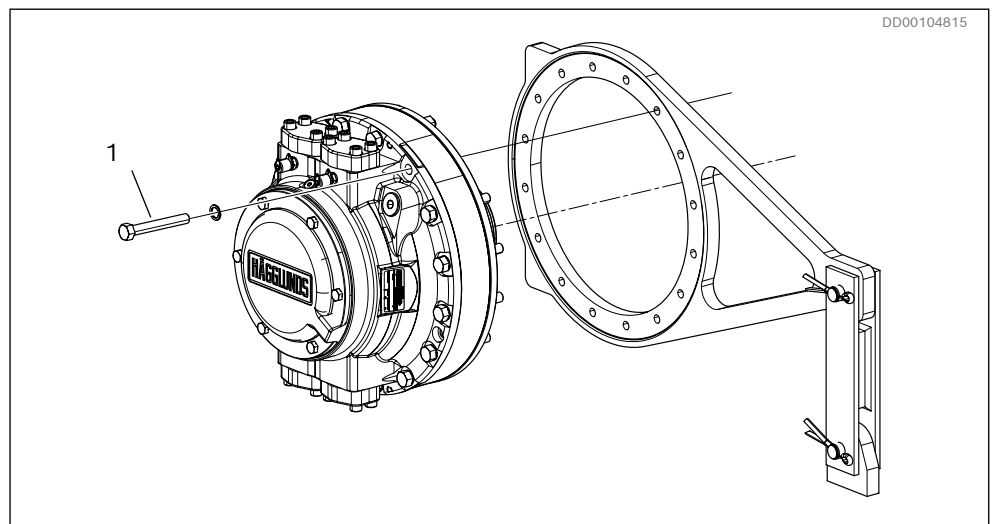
Mounting single ended torque arm TC A 0050 and TC A 0070 for CA 50 and CA 70
